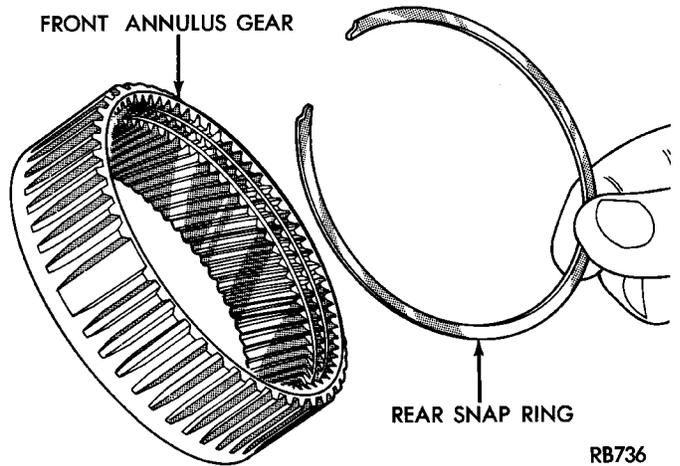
Front Annulus Gear Support Snap Ring LOW/REVERSE (REAR) SERVO-RECONDITION DISASSEMBLY
